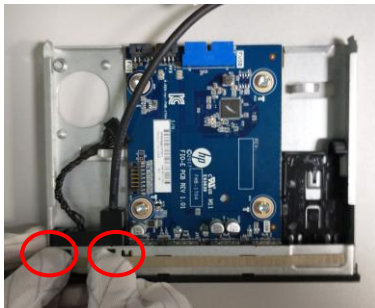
Release the front panel mount cable by push out 2 pins fixed black side in switch card tray.
